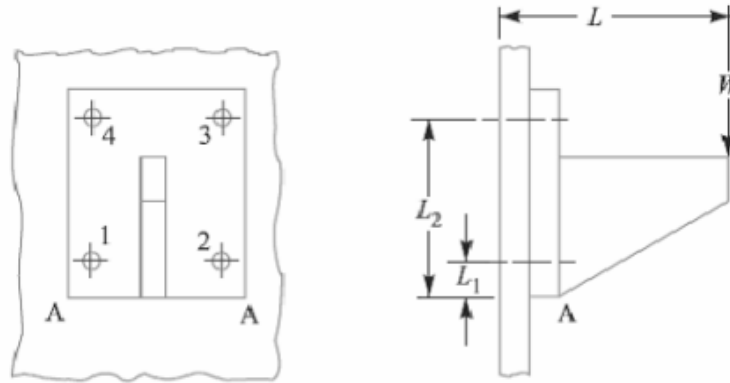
Eccentric load perpendicular to the axis of bolts.
